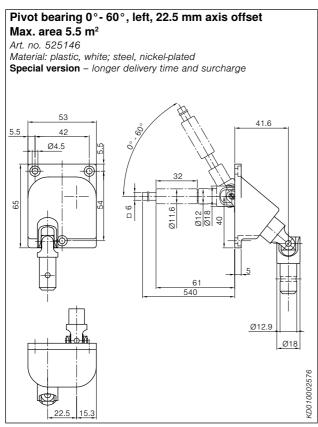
Pivot bearing 0°- 60°, left, 22.5 mm axis offset
